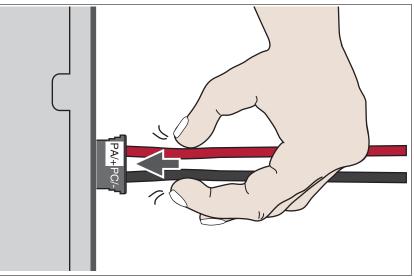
Unlocking the DC bus connector, step 1: Push cables towards connector.
